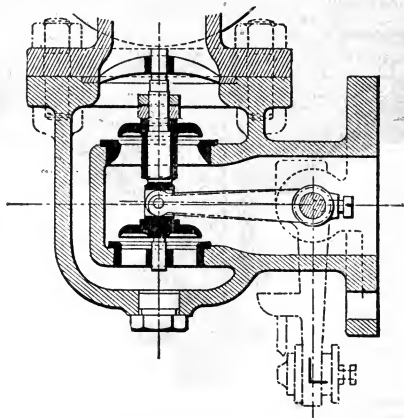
,434.—De Laval throttle valve; sectional view showing valve and seat. L, is the bell crank lever connection with the governor.
